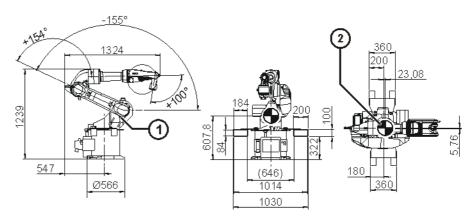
Transport dimensions, floor-mounted robot KR 16 L8 arc HW
